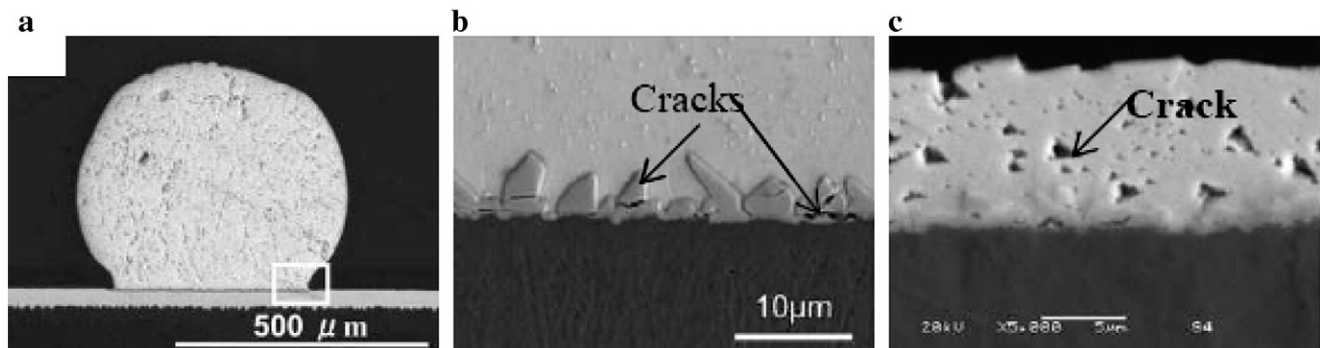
(a) A typical cross-sectioned ball grid array on Cu substrate. (b) Cross-sectioned sample of BGA type showing cracks. (c) Cross-sectioned sample of dipped Cu substrate showing the cracks. [66].
